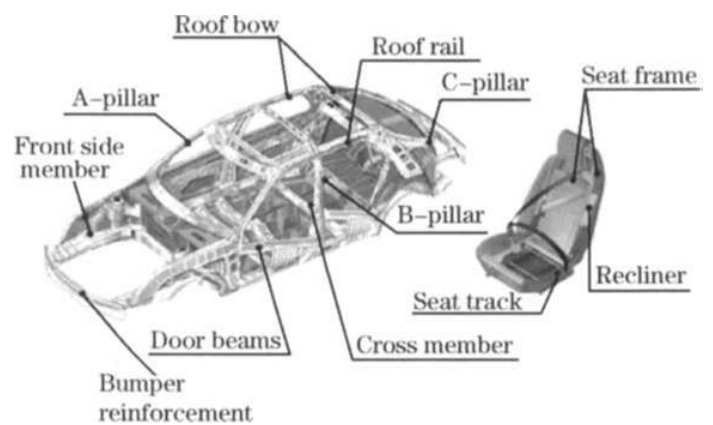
The automobile parts in which DP 600 steel is used [8].
